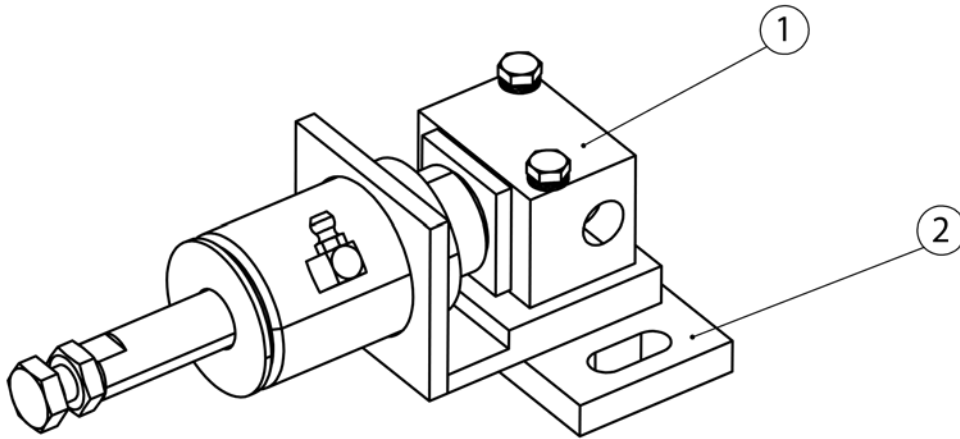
651538 Pestle Assembly incl. welding plate
